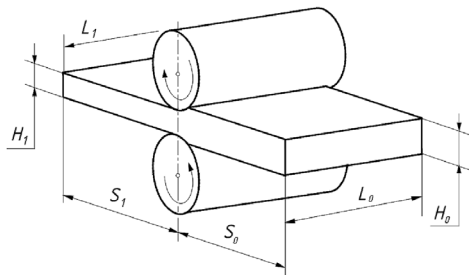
Diagram of rolling a straight strip with a rectangular cross-section between cylindrical rolls
